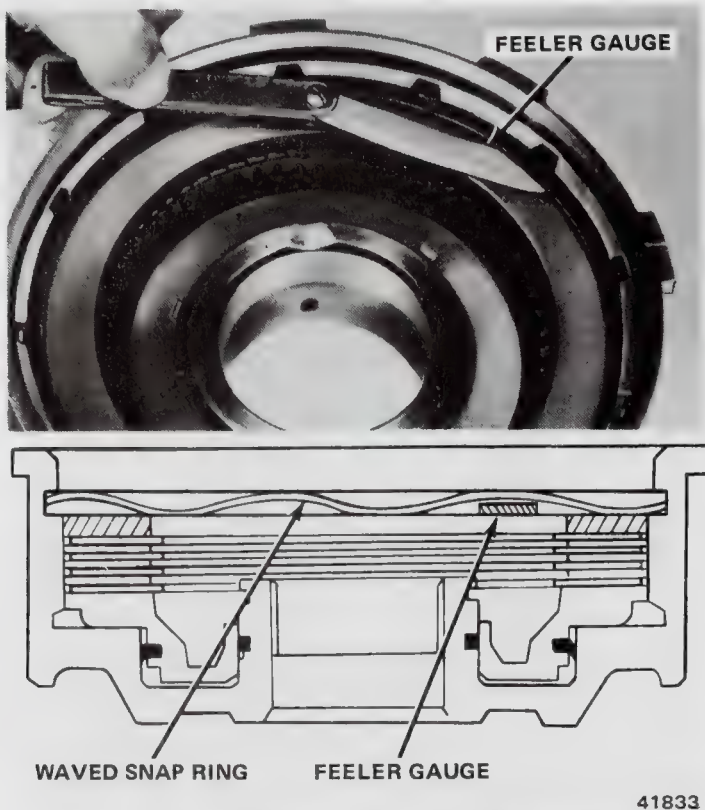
C-77 Measuring Front Clutch Pack Clearance
